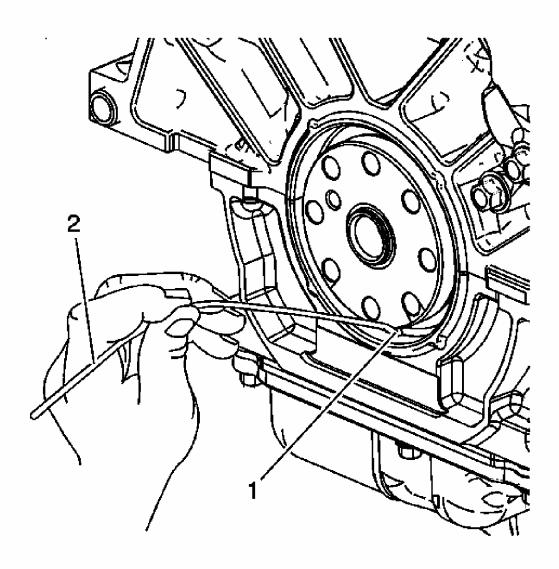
Identifying Rear Oil Seat Drain Courtesy of GENERAL MOTORS CORP.
